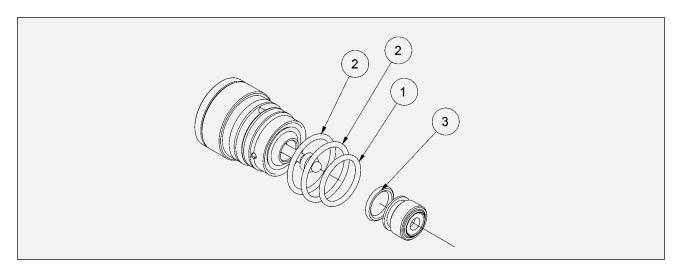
78949-00 Valve & 77367-00 Seat Replacement Parts
